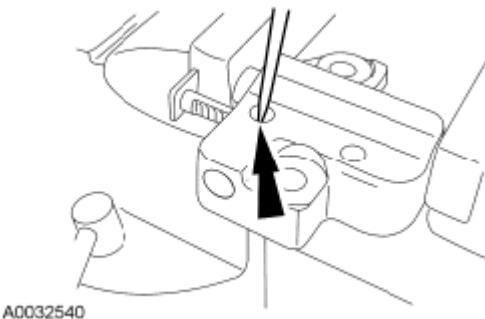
Holding Ratchet Mechanism Using Small Pick
